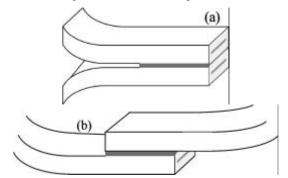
"Praying hands" (a), "shaking hands" (b) configuration for the joints
